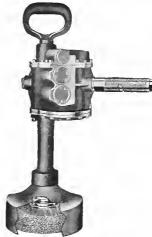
No. 4 "Little Giant" Grinder or Buffer.
